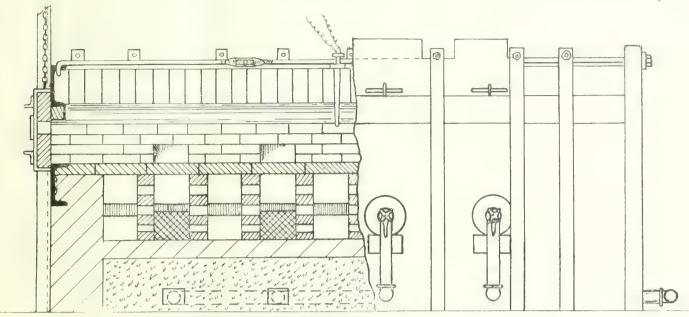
PART SECTION AND ELEVATION SHOWING PERFORATED SUPPORTING WALLS UNDER HEARTH.
